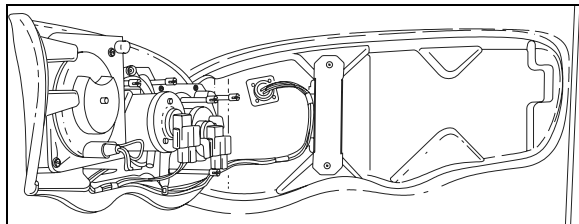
OPENING HEADLIGHT ASSEMBLY
